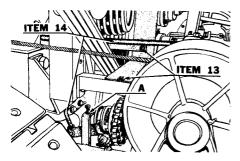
Hoist Worm Shaft Clutch Control—Left Side
